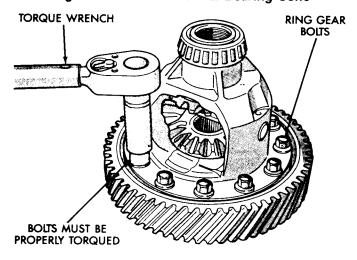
Torque New Ring Gear Bolts to 95 N·m (70 Ft. Lbs.)
